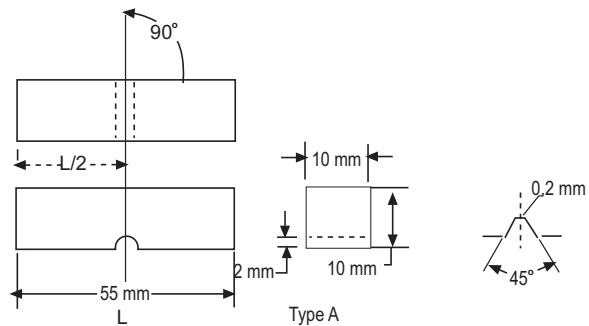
Dimensions of Charpy impact sample as ASTM E 23-24.
